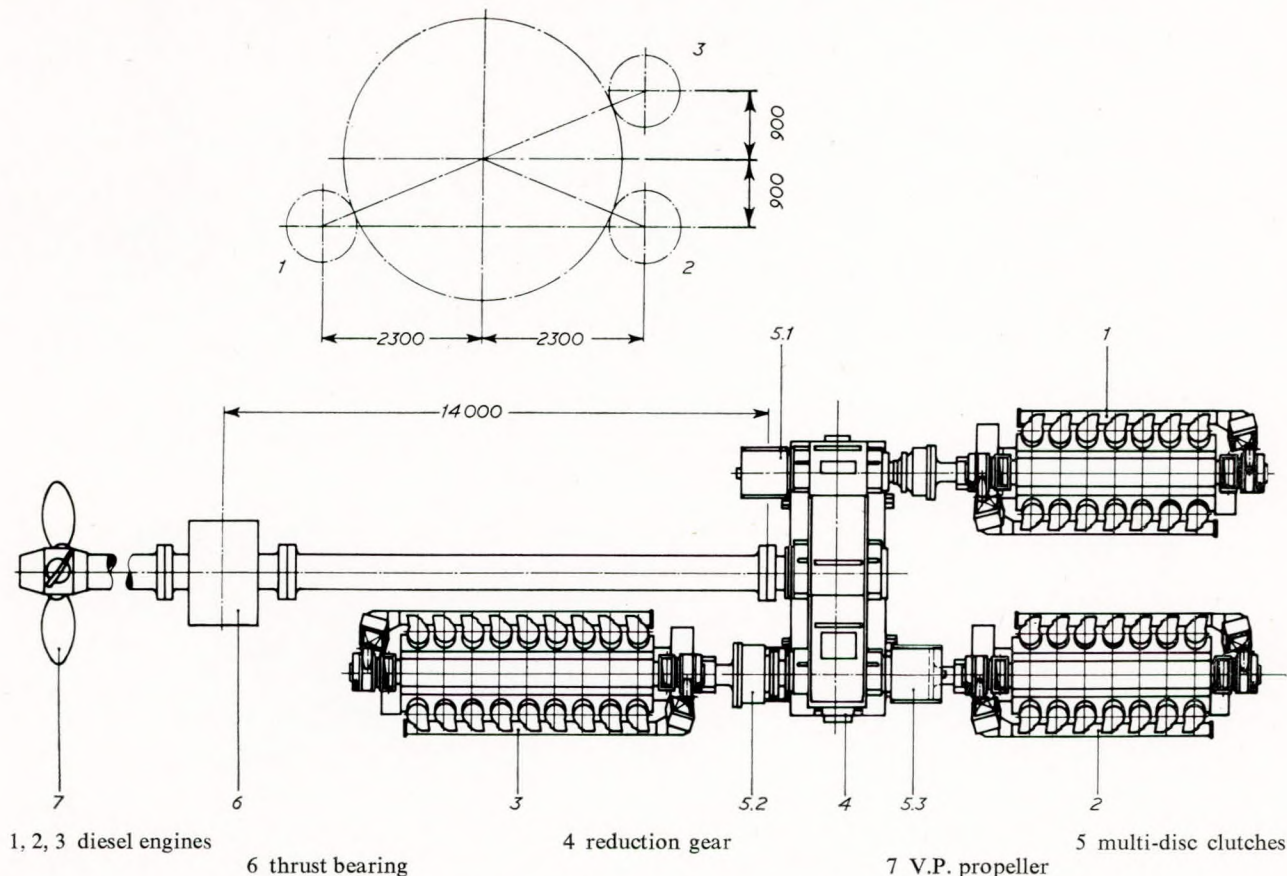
Propulsion plant with three diesel engines and 34 MW (46 000 hp) reduction gear
